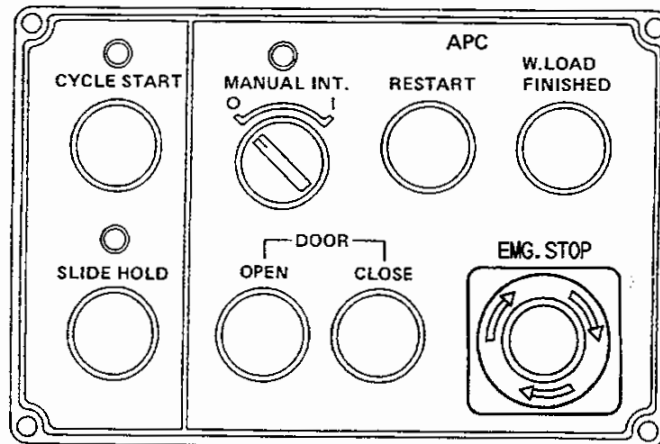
Parallel Type 2-Pallet APC Operation Panel (Horizontal Machining Centers)
